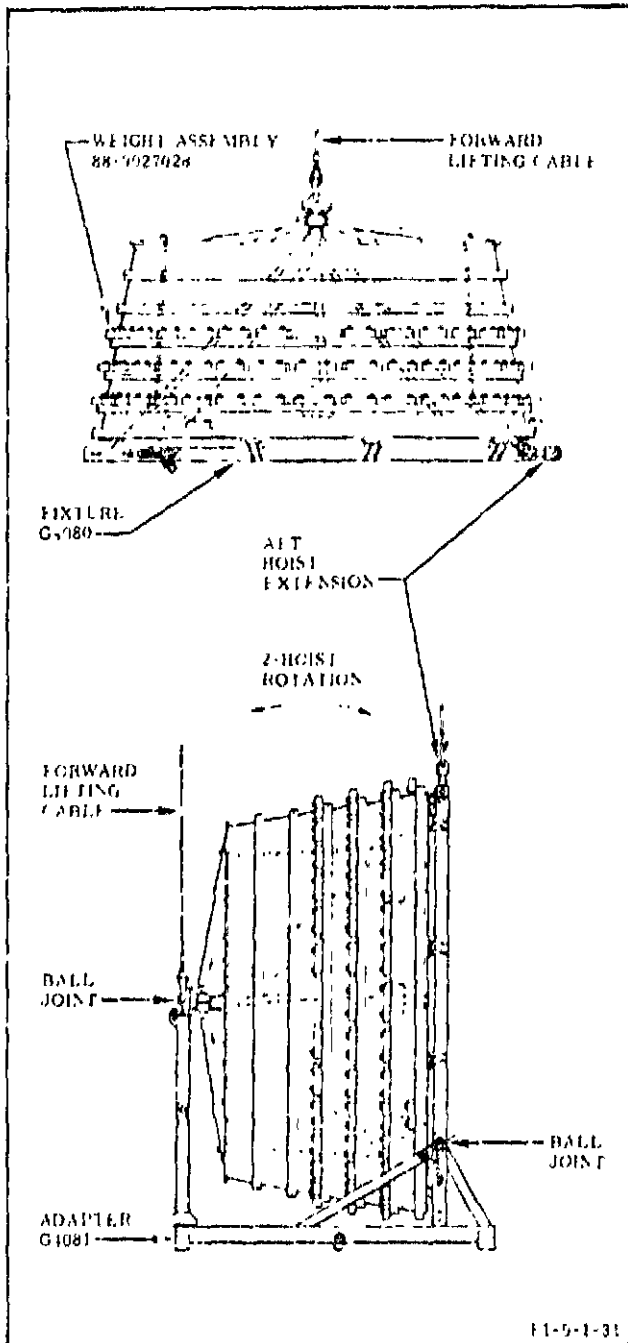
Recommended Proof-Test Setup for Nozzle Extension Handling Fixture and Adapter
